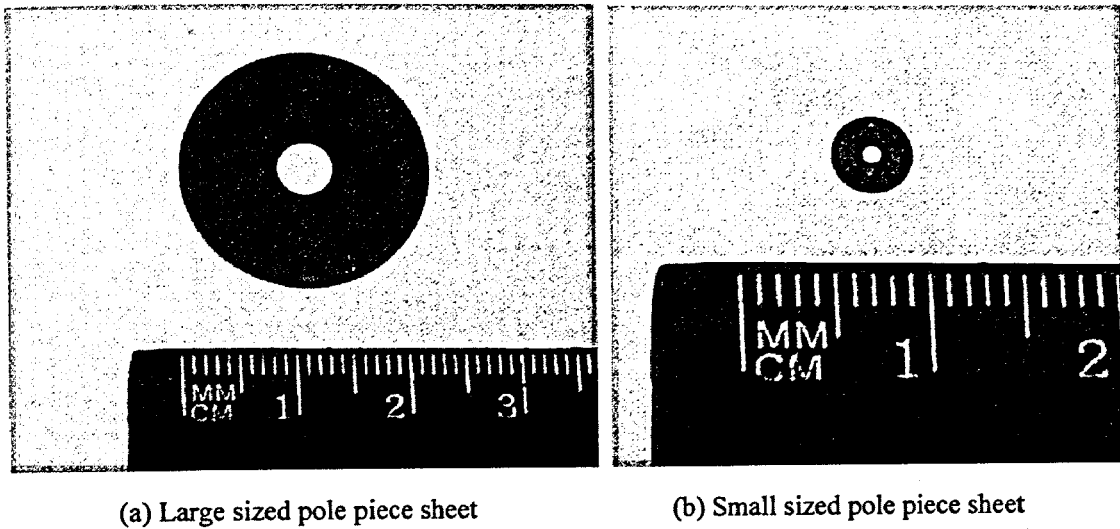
Pole piece sheets obtained by the proper setting of the laser power
